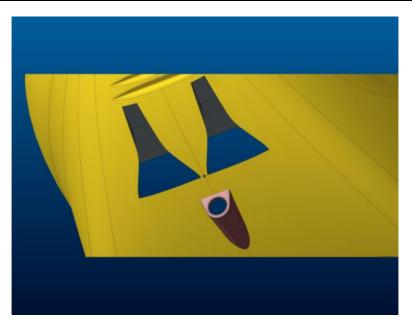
Draining system – lower engine cowling – hole between air inlets
